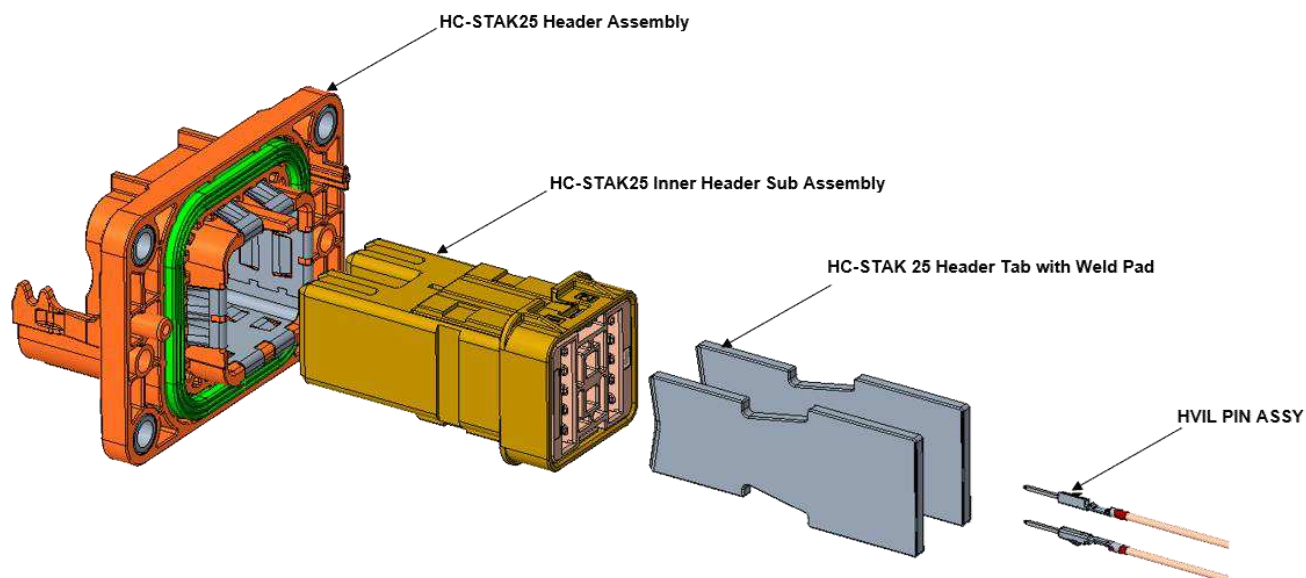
Exploded View HC-STAK25, 4-Bolt Header
